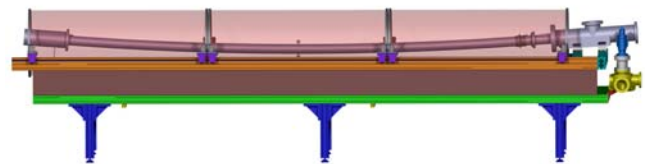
Drawing of the magnetron sputtering system, which will be used for the NEG coating of the HESR dipole chambers.
